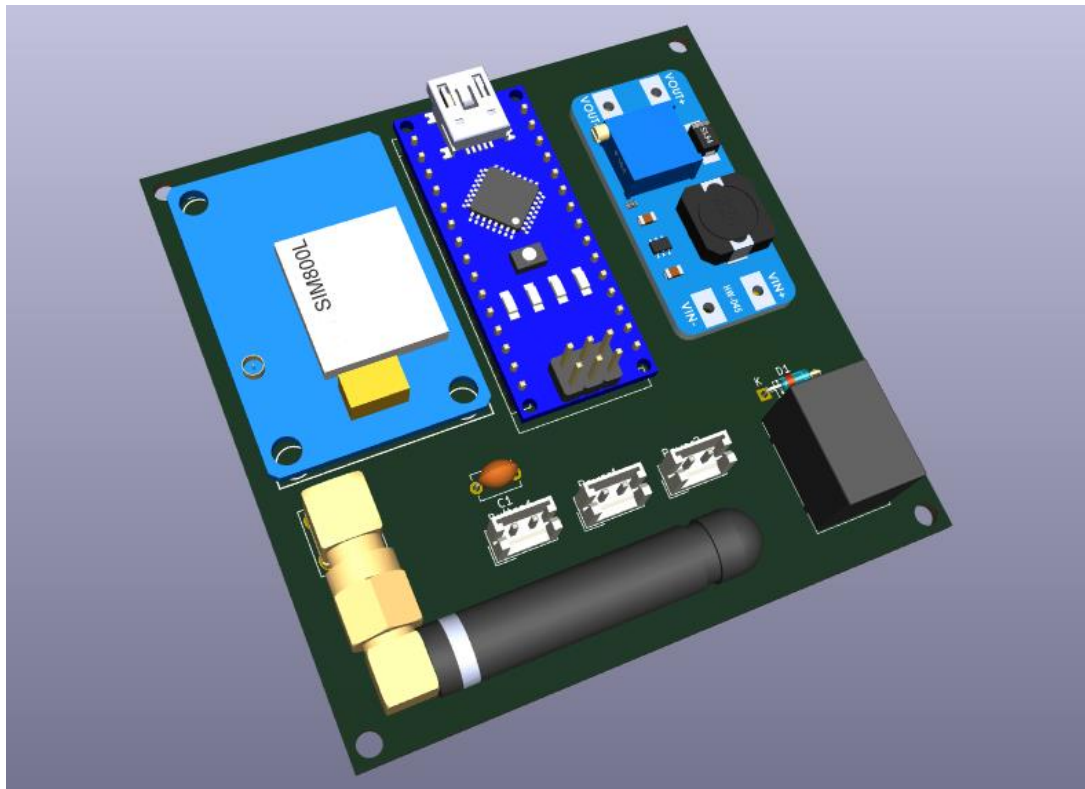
3D MODEL OF PCB FRONT VIEW
